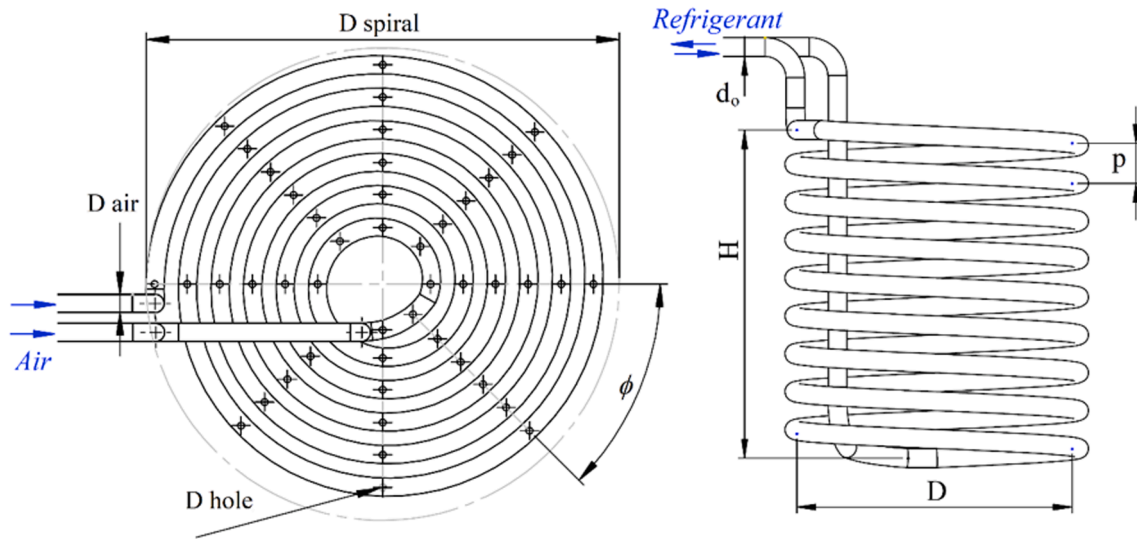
Geometry and dimensions of the different spiral coils and evaporator helical coils in experiments.
